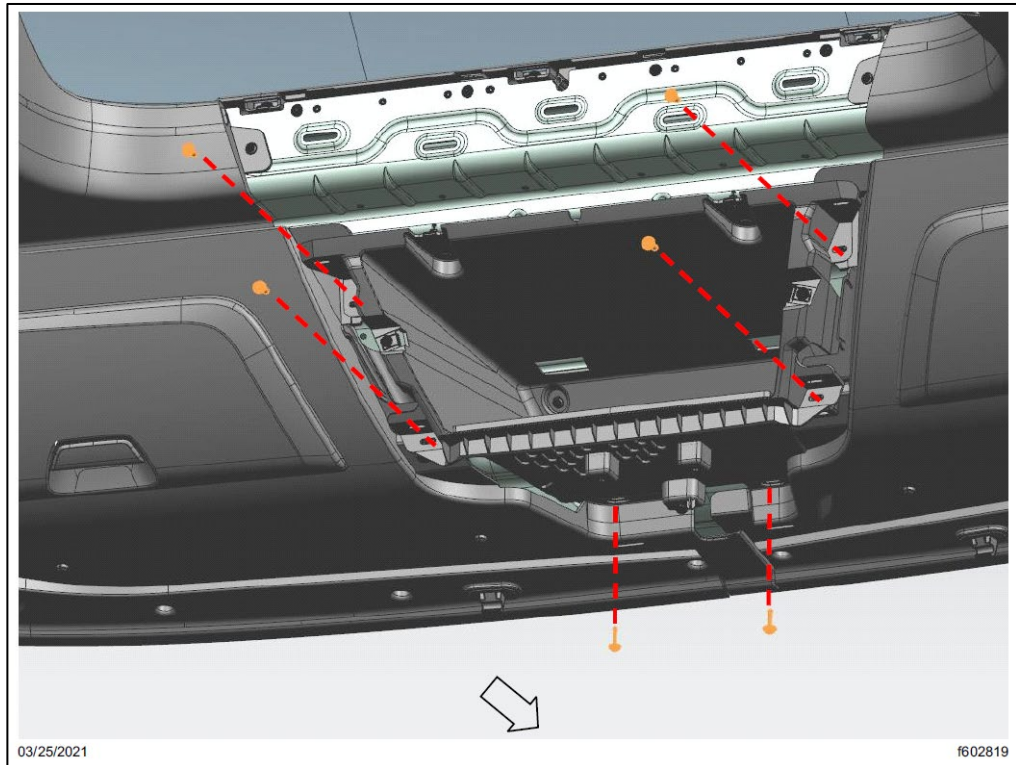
, Fasteners That Attach the Center Storage Bin to the LH and RH Overhead Storage Assemblies
